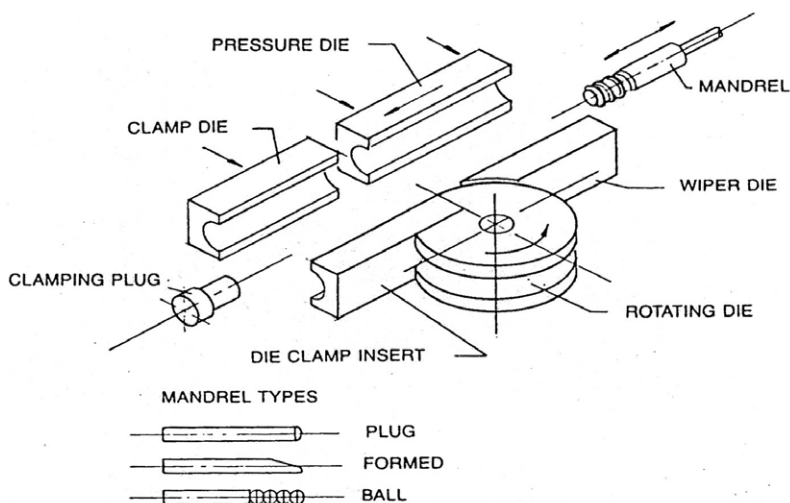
Operational drawing on the radial bending tools for round stainless steel hollow sections /Pipe and Tube Bending Manual, John Gillanders/
